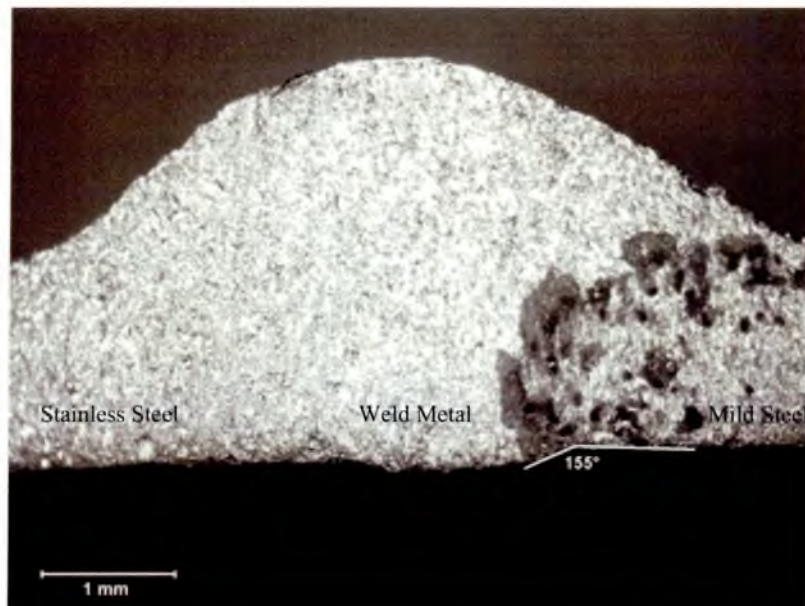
Example of root angle measurement on CMT similar thickness butt joint
